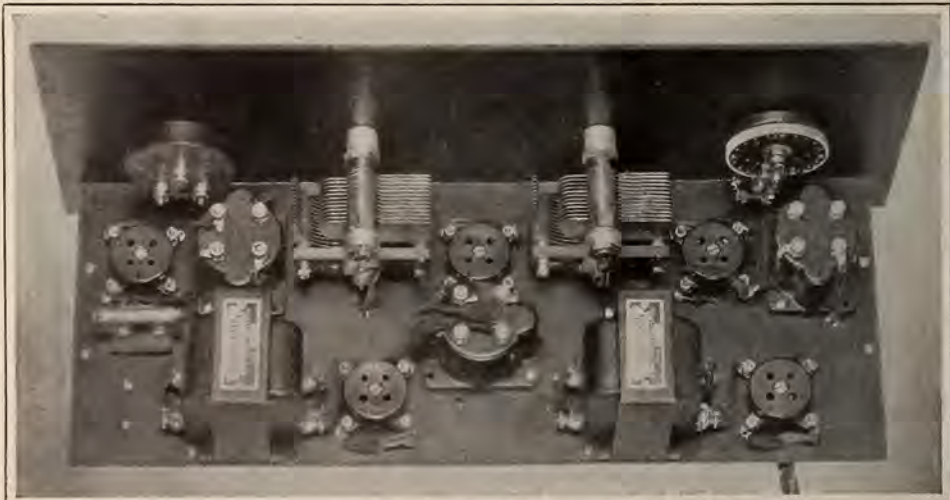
Rear panel view of the completed receiver showing all parts placed and wired
